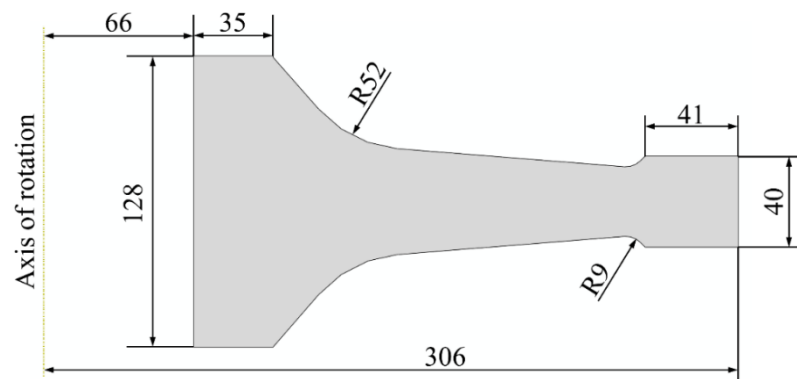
The geometry of a typical turbine disk (dimensions in millimetres)
